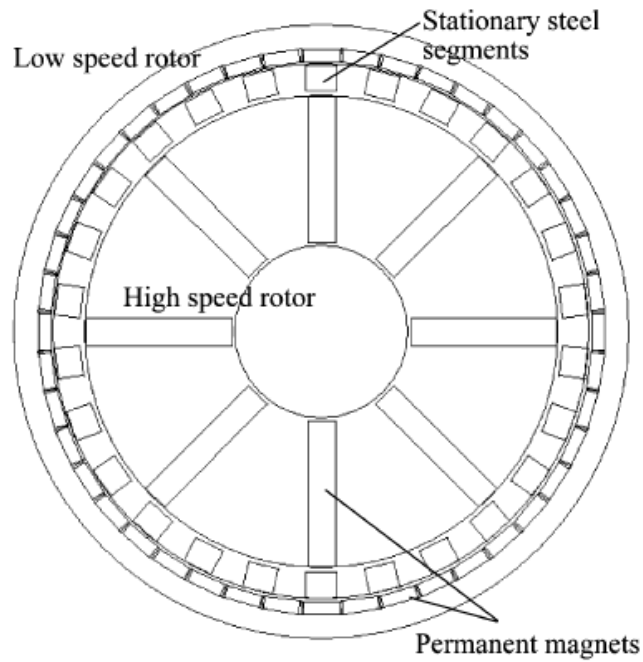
Coaxial magnetic gear with spoke type of PMs on inner rotor [9].
